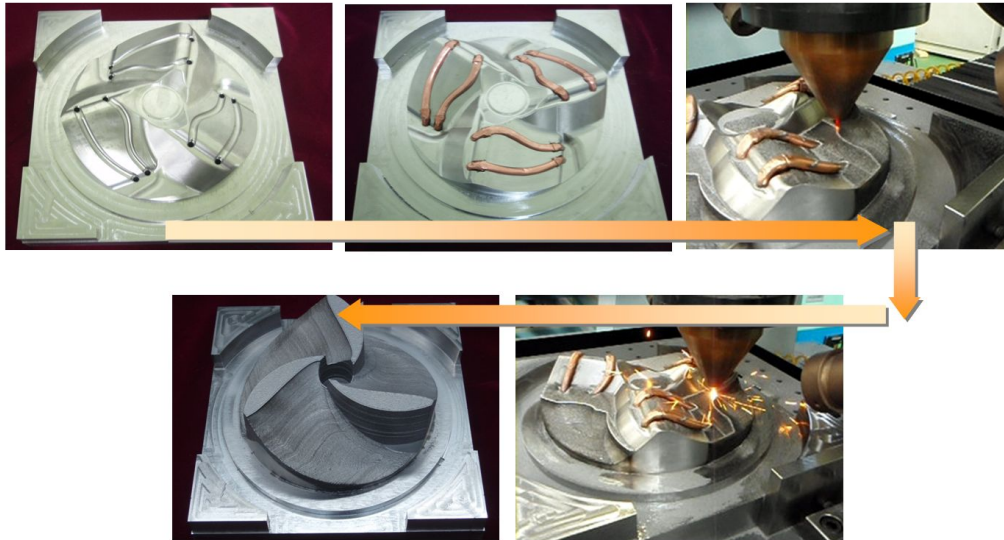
Manufacturing process of DMT (Laser aided Direct Metal Tooling process)
